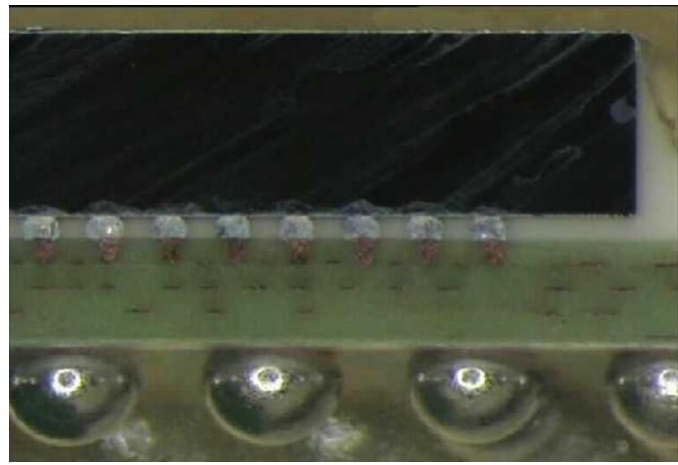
Flip-Chip package (UF + Mold) Real
